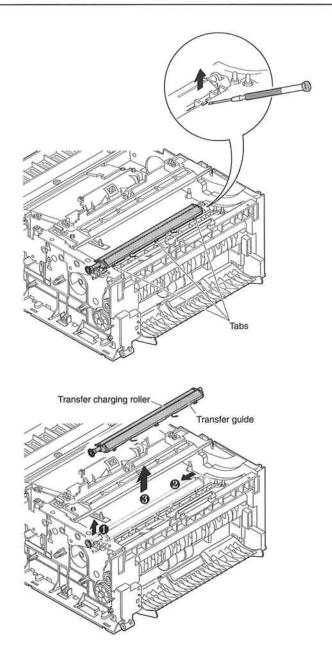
Disassembly Procedure (Transfer Charging Roller)
